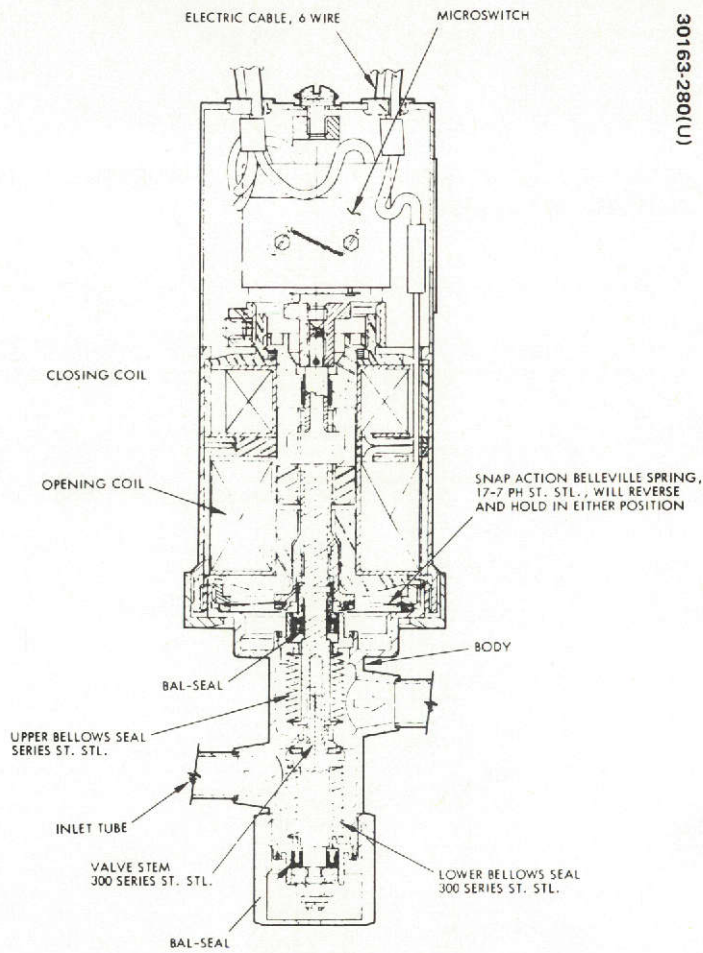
FILL AND DRAIN VALVE ASSEMBLY (PHOTO A29088)
